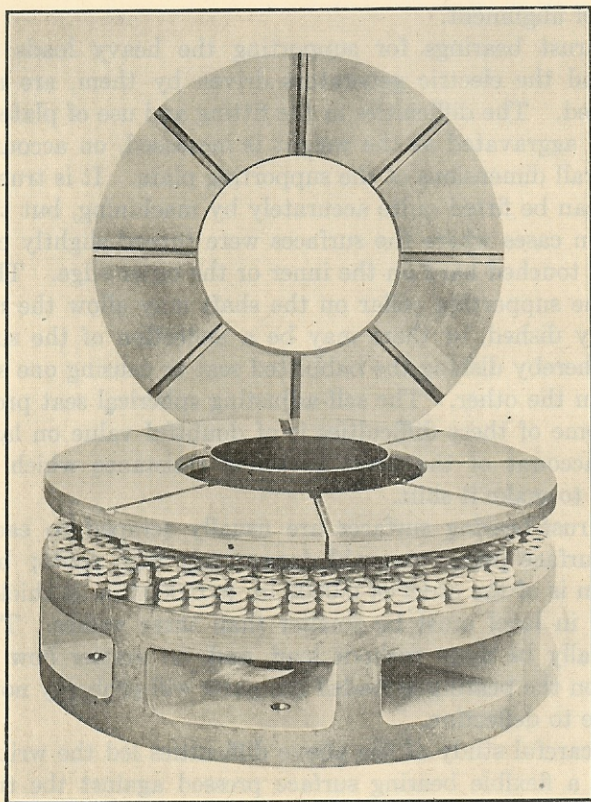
SPRING THRUST BEARING, FOR VERTICAL WATER-WHEEL-DRIVEN GENERATOR, TO CARRY A LOAD OF 300,000 LB. AT 100 R.P.M.
